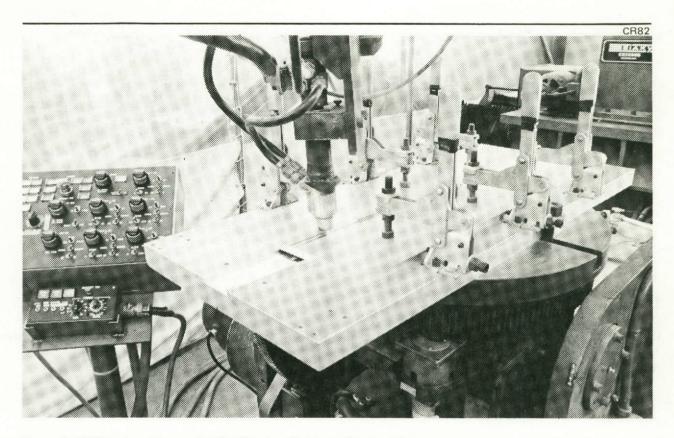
Welding Arrangement for Test Panels with Tapered Lack of Penetration
